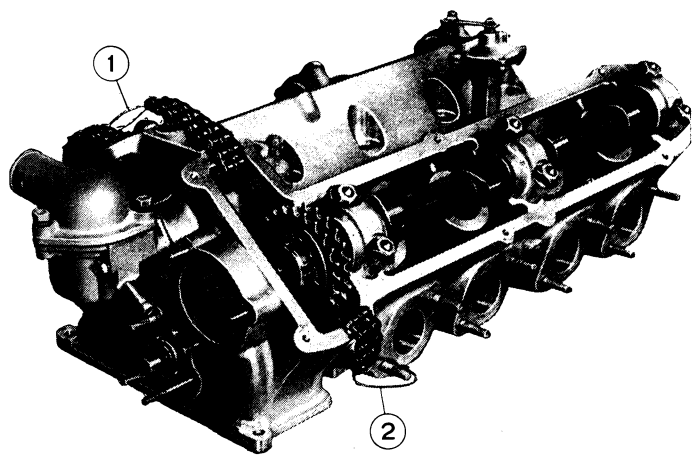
Timing chain opened for tappet clearance adjustment (engine 118 B.000).
